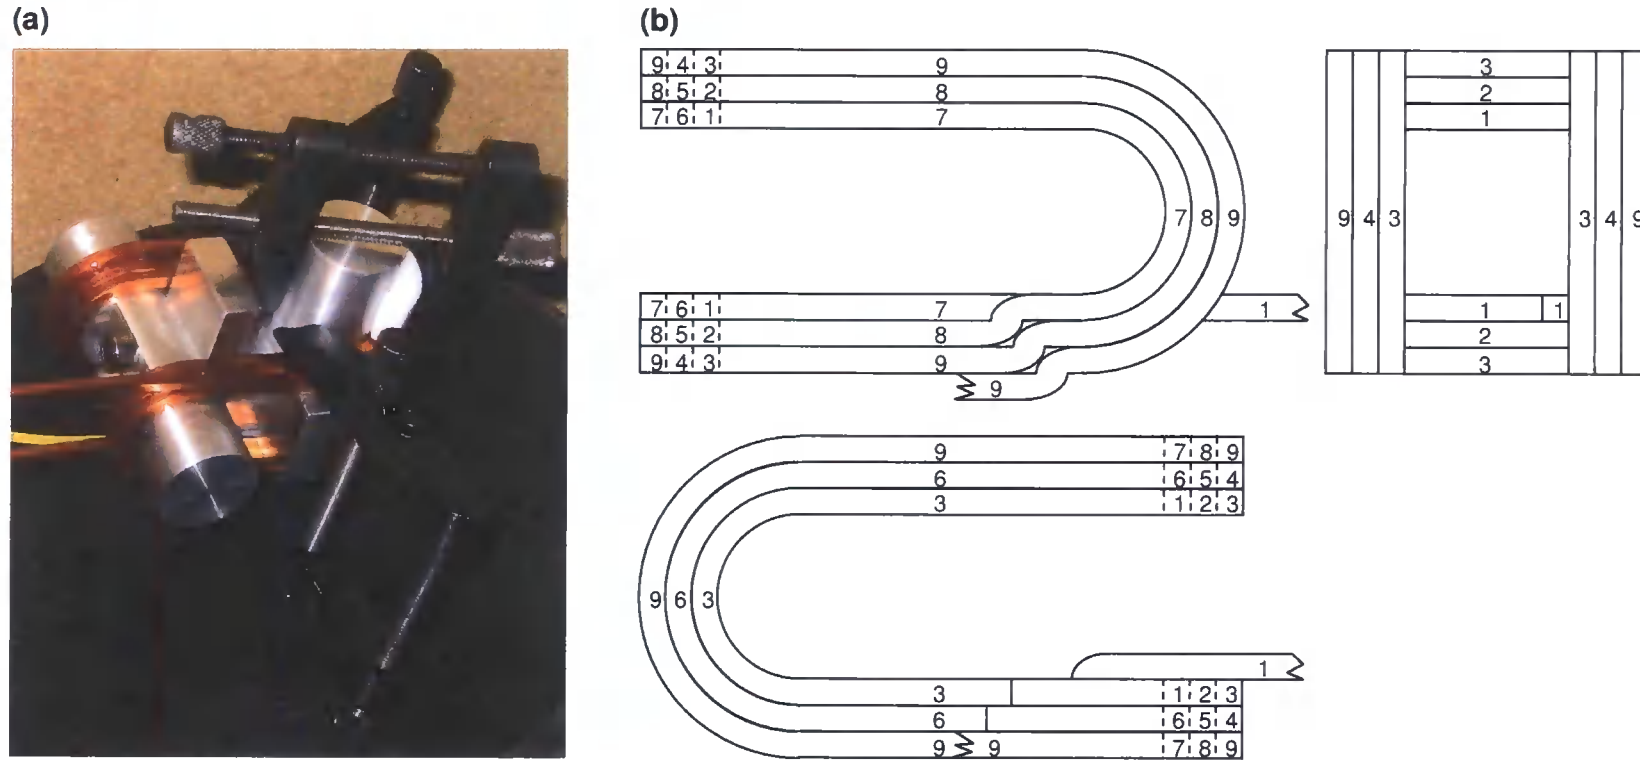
Winding the baseball coil. The coil is wound in steps of  $\simeq \frac{1}{4}$  of a turn, during which the wound wire is glued in place (section C.2.1). Between winding steps the coil is held in position using toolmakers clamps with rubber coated tips to avoid scratching the wire's Kapton insulation. The former around which the coil is wound consists of two aluminium cylinders with diameter equal the inner diameter of the finished baseball radial sections and a series of aluminium plates. The former sections are screwed together such that removing the screws allows the cylinders and plates to be removed from the coil once winding is complete. The winding pattern of the baseball (b) requires the outer turns 4 and 5 to be wound prior to the inner turn 6. This is achieved by using two hollow semi-cylindrical spacers with inner (outer) radial diameters equal to the outer (inner) radial diameter of the former (turn 4 and turn 5 respectively). This can be seen in (a).
